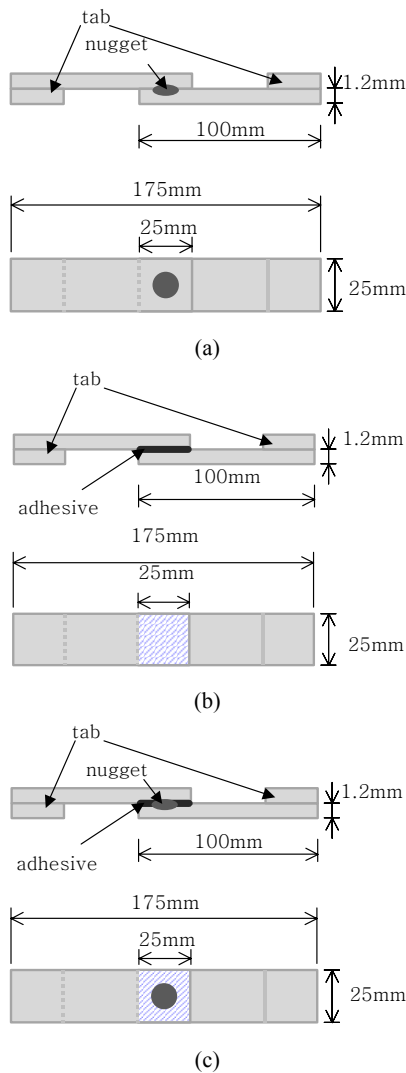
Schematic diagram of bonding method; (a) Resistance spot welding (b) Adhesive bond and (c) Weld-bond
